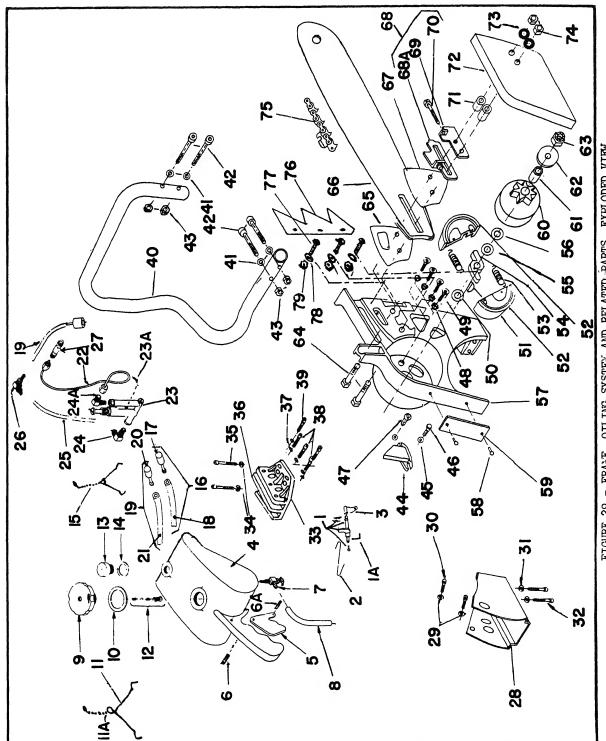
FRAME, OILING SYSTEM AND RELATED PARTS, EXPLODED VIEW.
